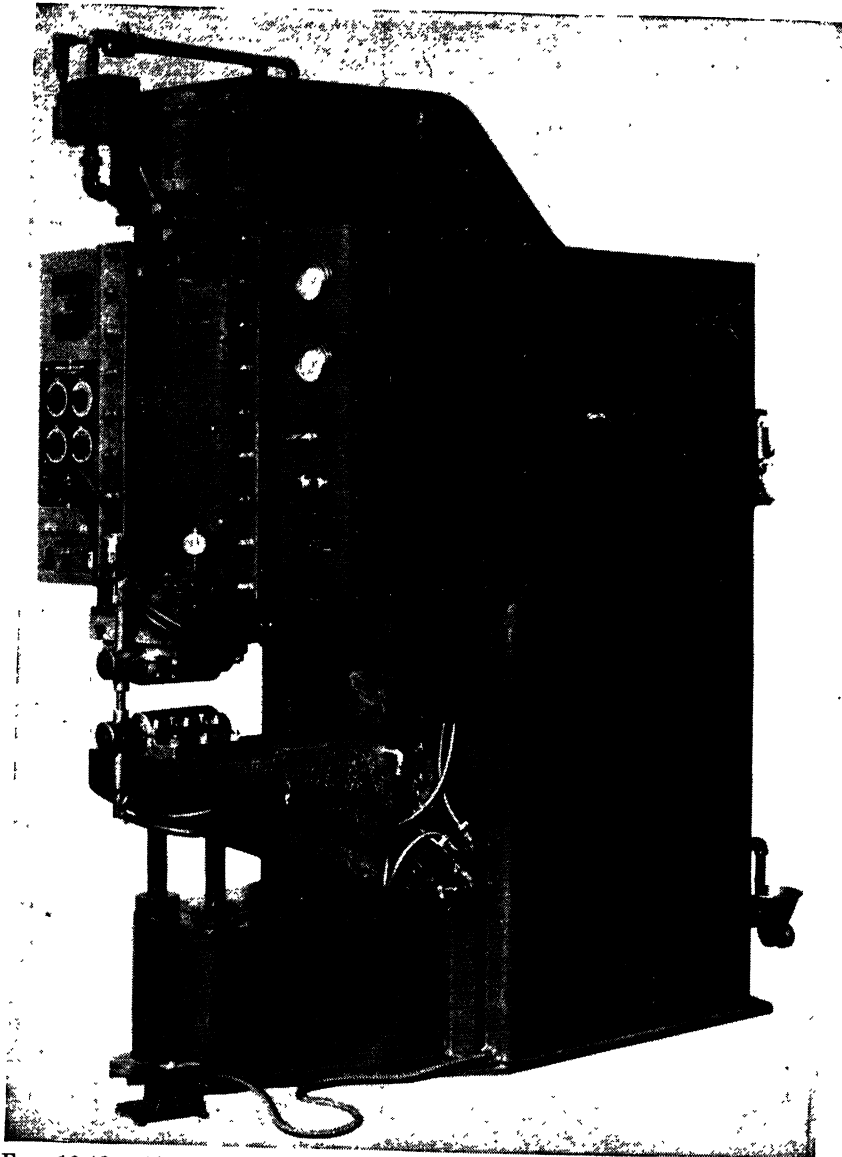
Air-Operated Heavy-Duty Press-Type Spot Welder for General-Purpose Use with Built-In Electronic Control.
